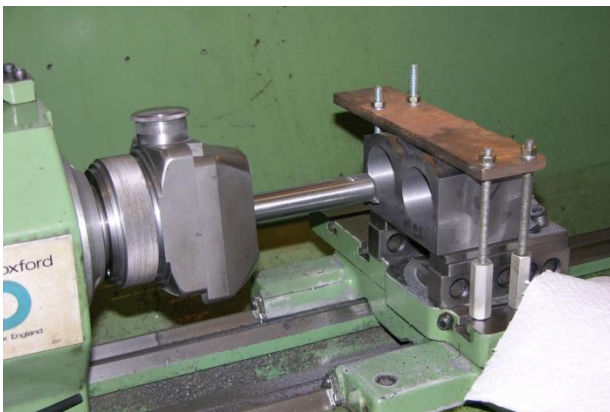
shows the boring set up and the boring head. The bores were first clocked and checked for height and centers, I then realized that any wear on the cross slide screw would put the bore centers out when indexing across. To solve this problem I added a temporary digital scale to my lathe cross slide to read off the distance directly. To do this I made an alloy dovetail clamp to fit the cross slide a small brass screw to nip on the dovetail slide and two small brass clamps to hold my digital calliper (see Photo x). As my lathe is metric, a movement of 2.000" should have been 50.8 mm on the scale. But in fact I had to move the scale a reading of 50.82 showing that the lead screw is out by .0015" over two inches.
